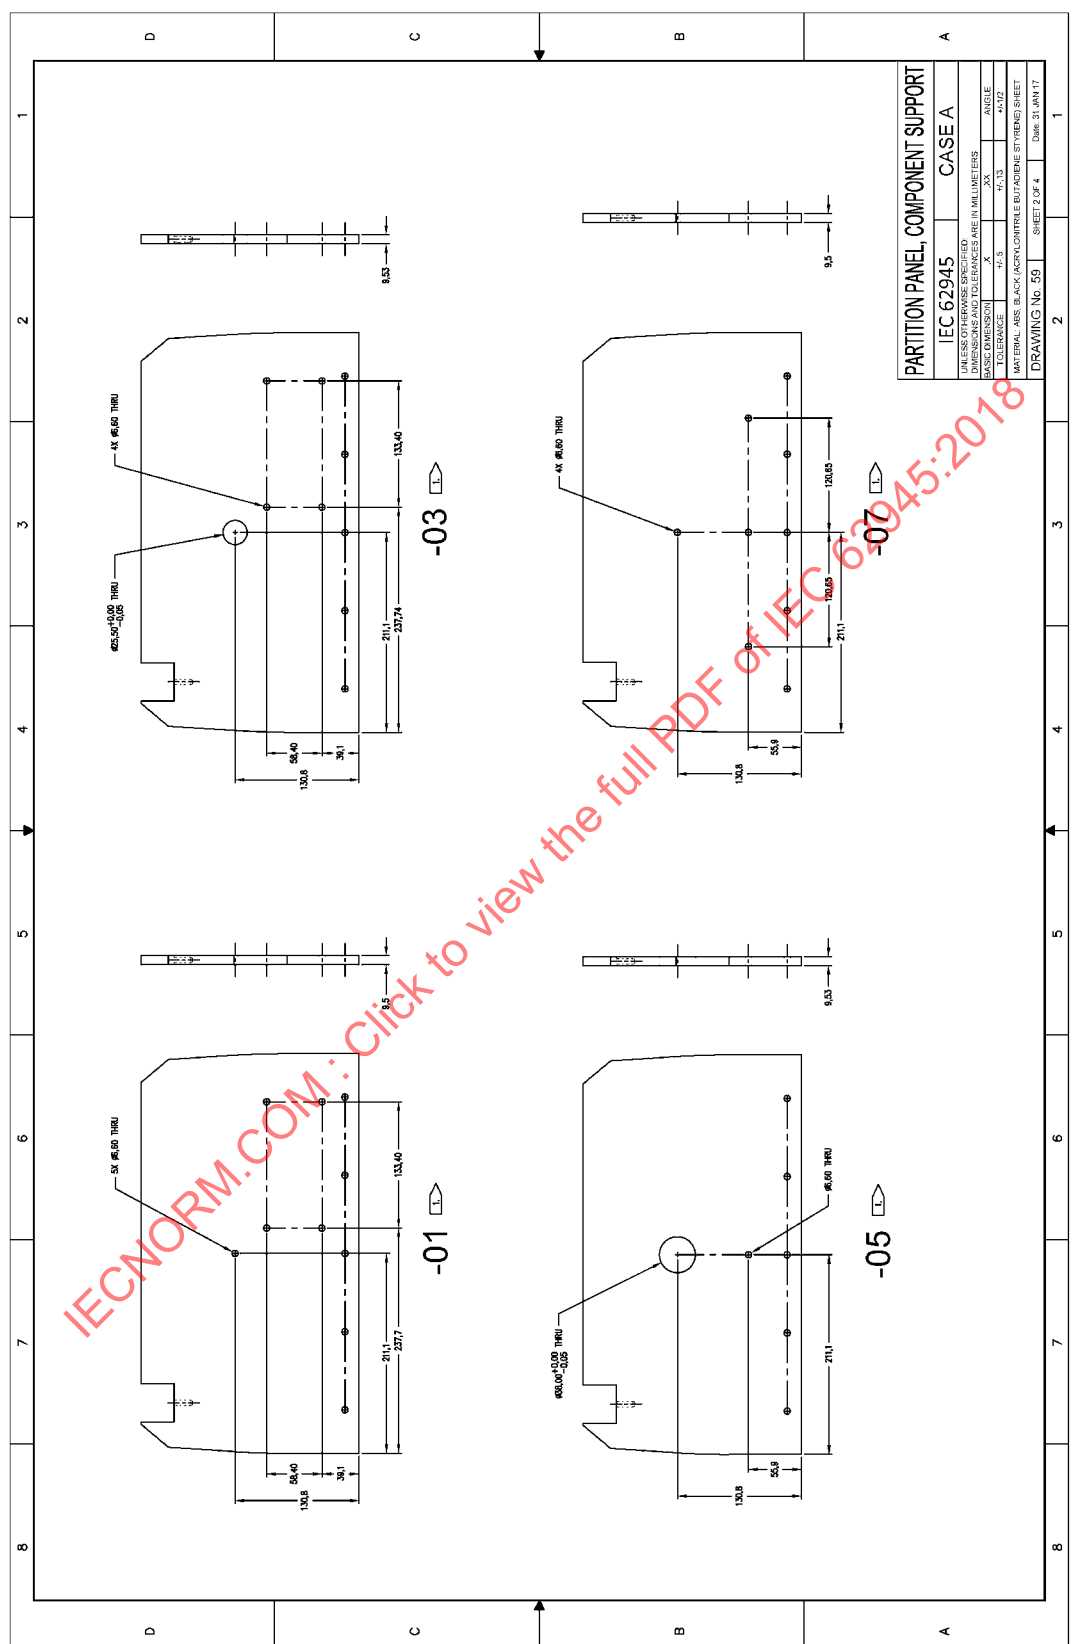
Partition panel for component support, Case A (drawing 2 of 4)
